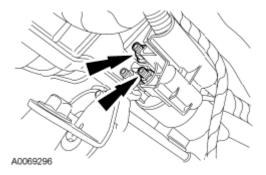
Locating Starter Motor Stud Bolt And Nut Courtesy of FORD MOTOR CO.
